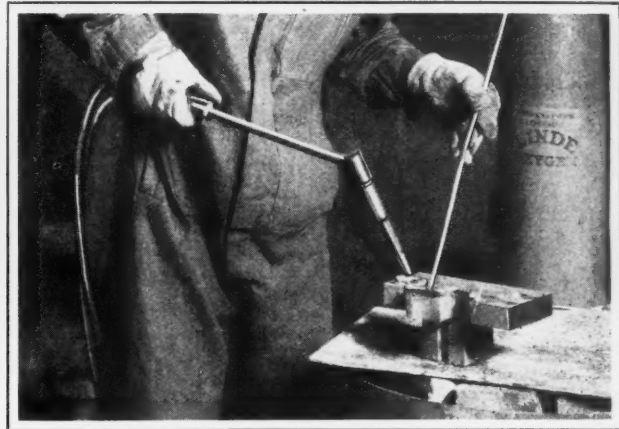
Proper Method of holding the Blow-pipe and Rod in stelliting Small Irregular Surfaces
